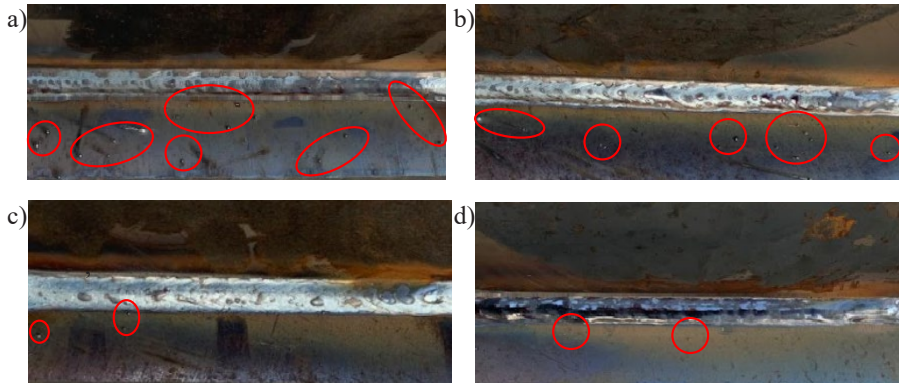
Amounts of spatter on welding seams with different shielding gases welded at 300 A parameters: a) M25; b) M18; c) M8; d) C3.
